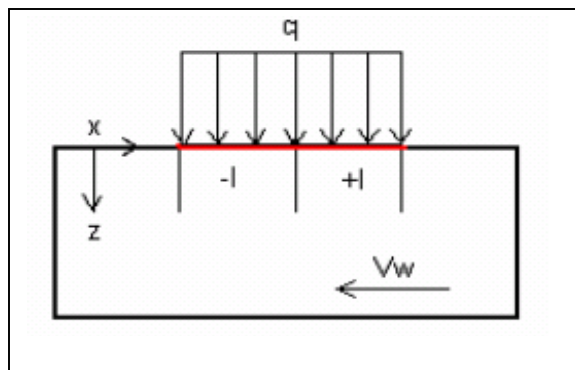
Uniformly distributed plane band heat source moving along workpiece surface
